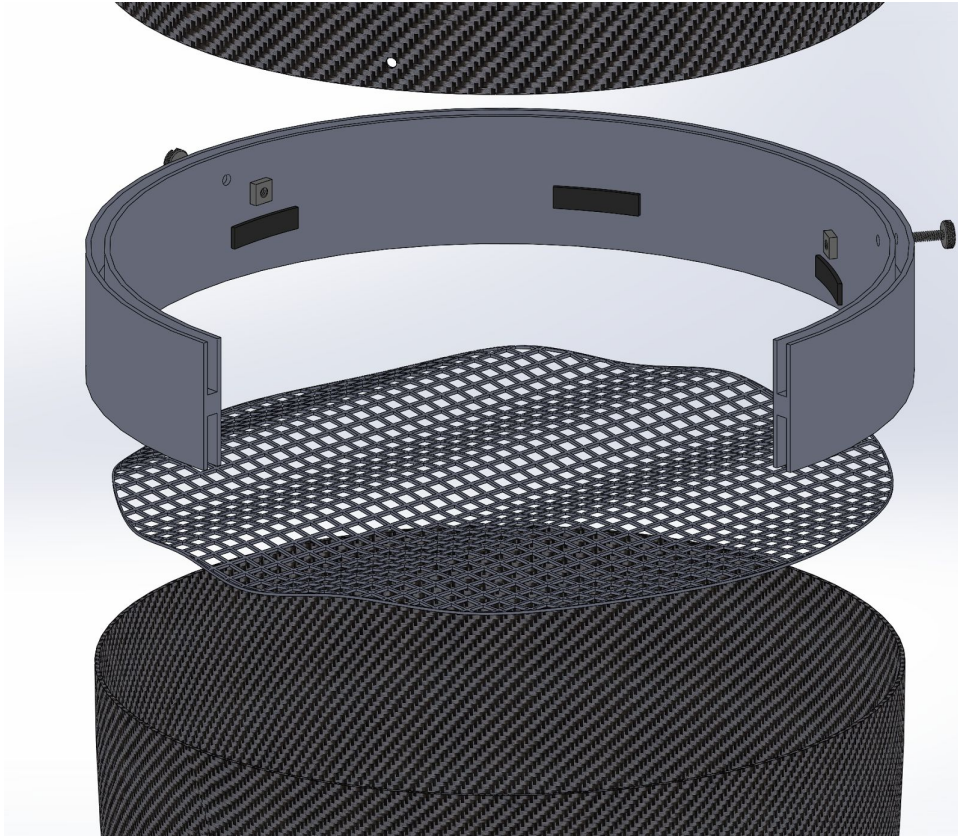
The stiffening ring assembly is shown with a section view revealing the attachment mechanism. Note: Reciprocating velcro strips not shown in view
